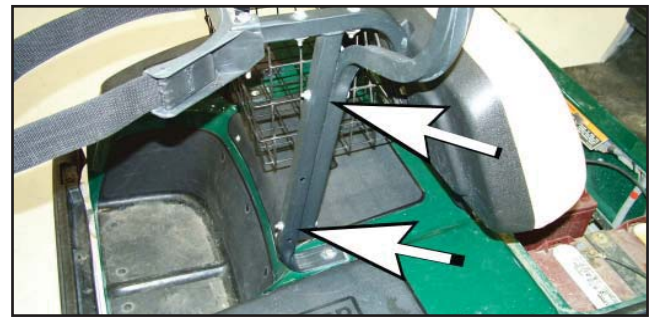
Remove Rear Top Support (2001 1/2 & Newer Shown Above)
